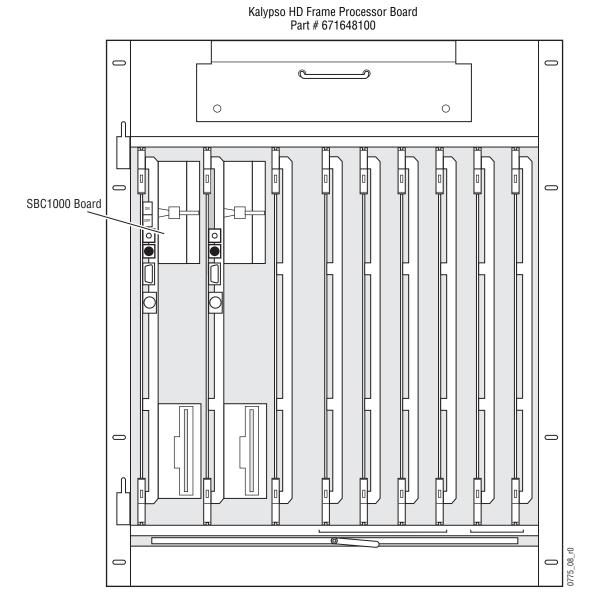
Top view of Kalypso HD Frame and Still Store processor board with SBC1000
